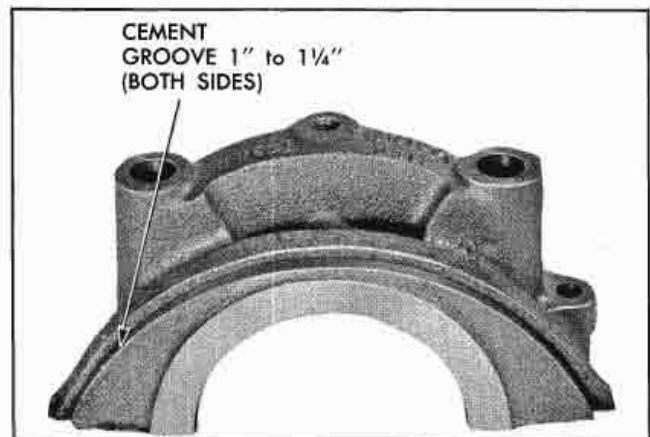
Rear Oil Pan Gasket Positioned in Bearing Cap
